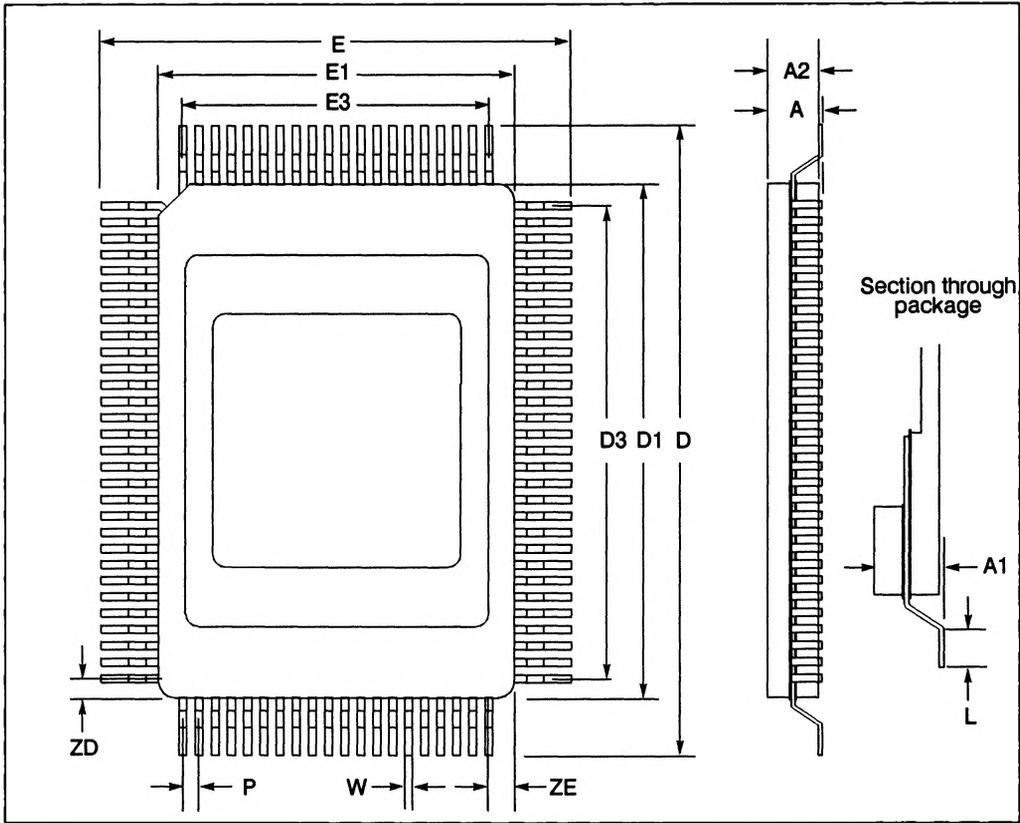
100 pin ceramic quad flatpack package dimensions
